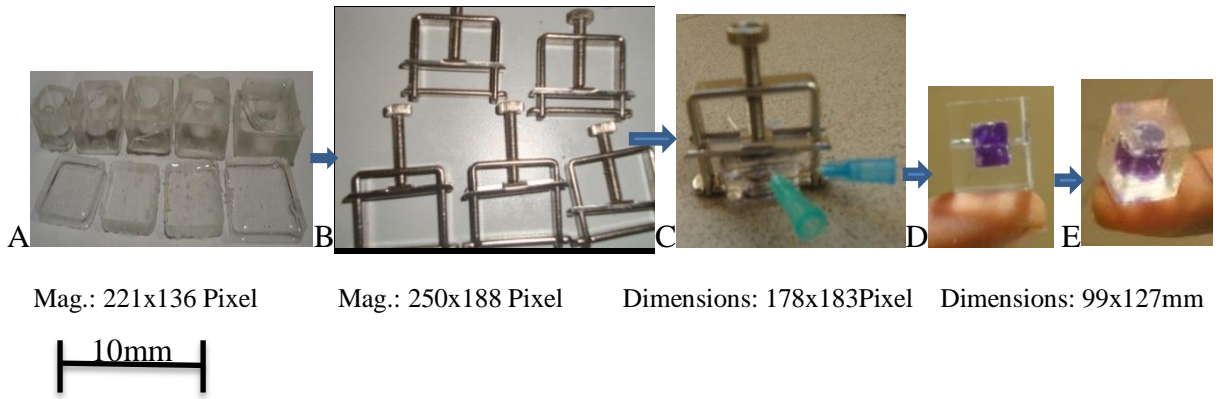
; (A) PDMS packages; (B) Clamping devices; (C) Clamped encapsulated device with surgery needles used to create micro-channels within the device; (D) Encapsulated PNIPA in a PDMS package; (E) Three-dimensional view of the device.
